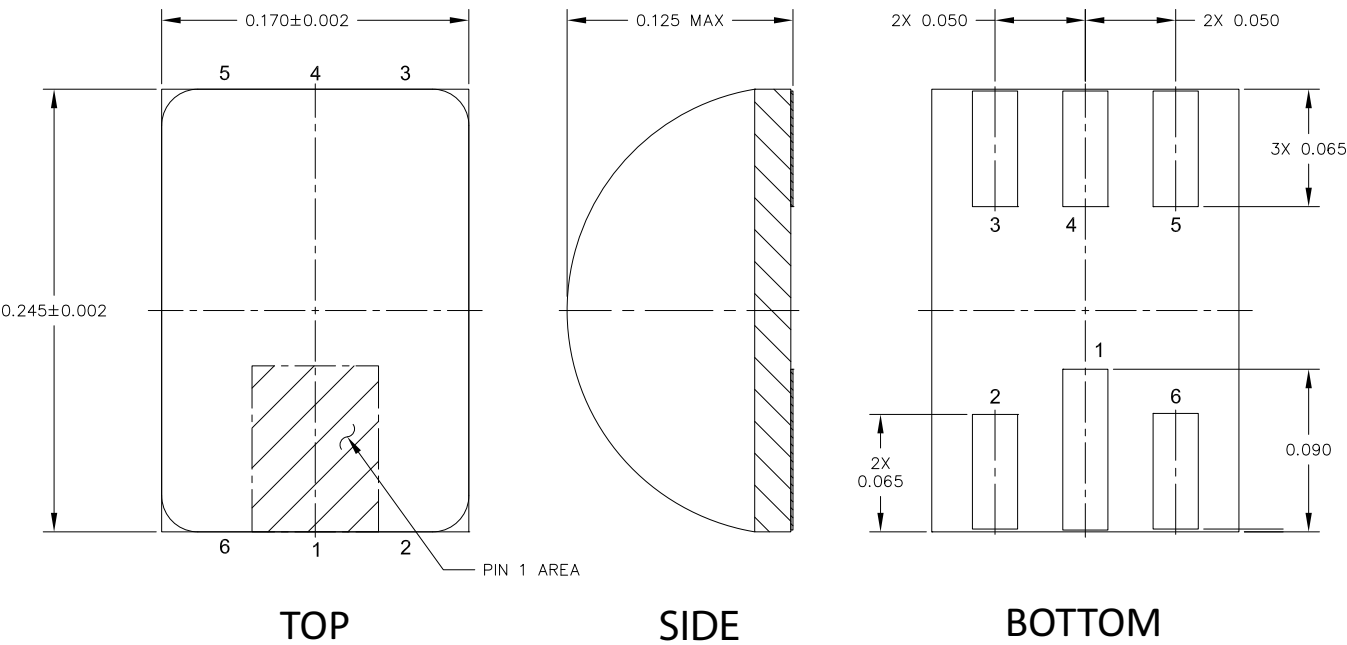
Package Dimensions, 6-Lead Glob Top SMT
